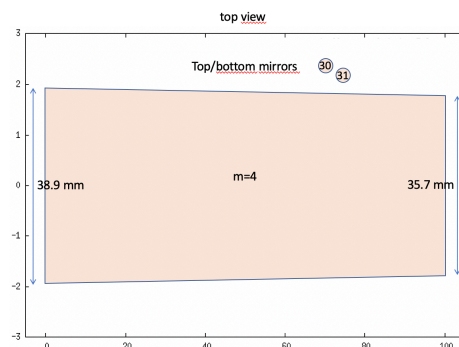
Supermirrors assembly description: top and bottom mirrors.
